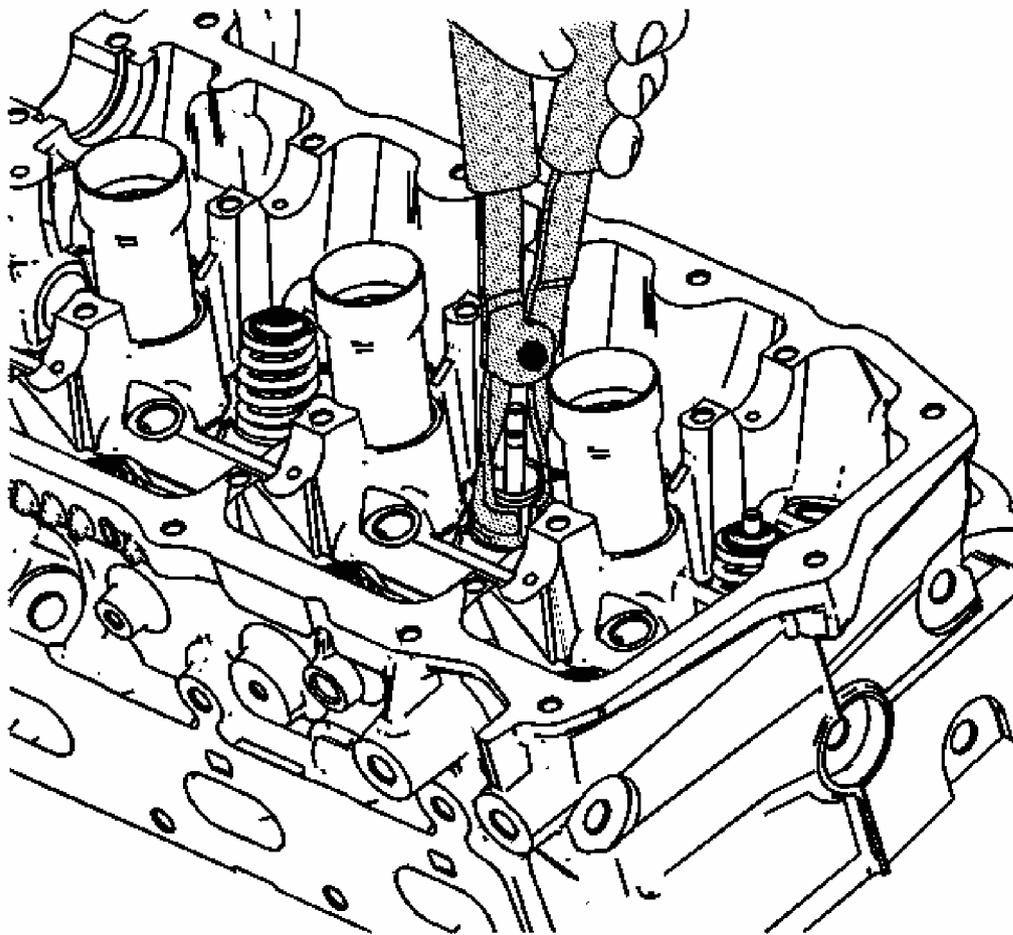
Removing/Installing Valve Stem Oil Seals With EN 46116
